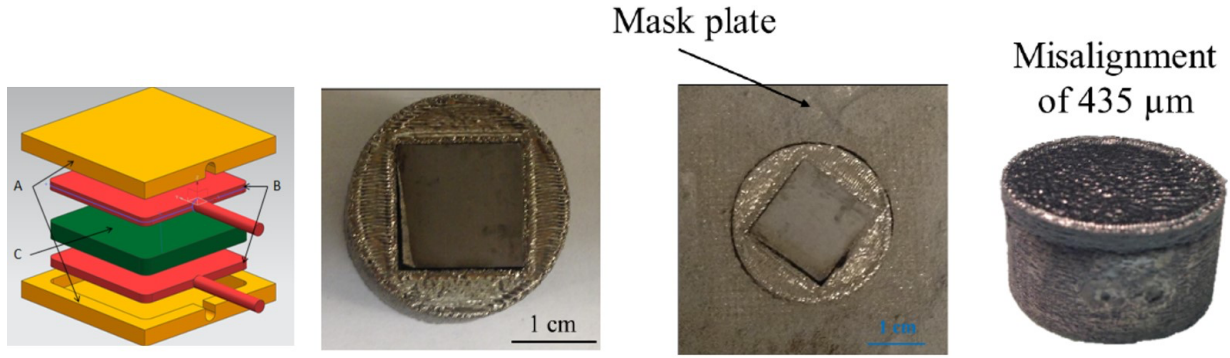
Fabricated 1st design. Schematic view of the assembly and the top view of the smart part with sensor components before being placed on the mask plate. The fabrication finished with misalignment of 435 μm .
